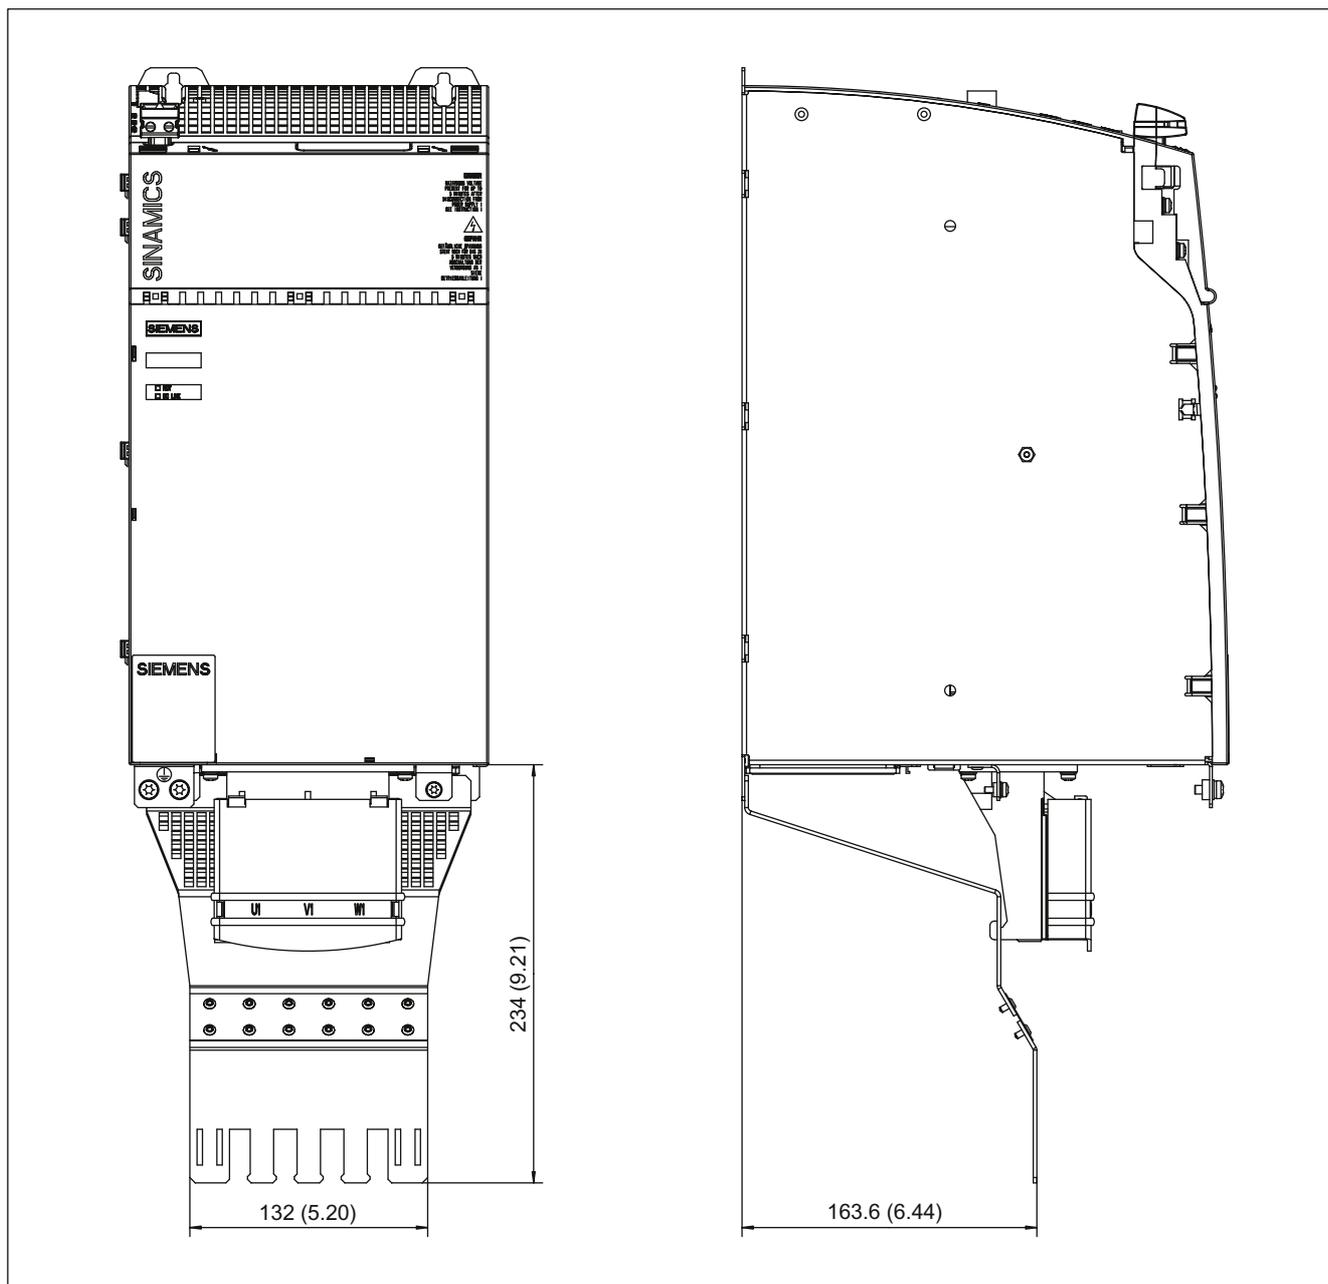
Dimension drawing of shield connecting plate on a 200 mm component with internal air cooling, all dimensions in mm and (inches)
